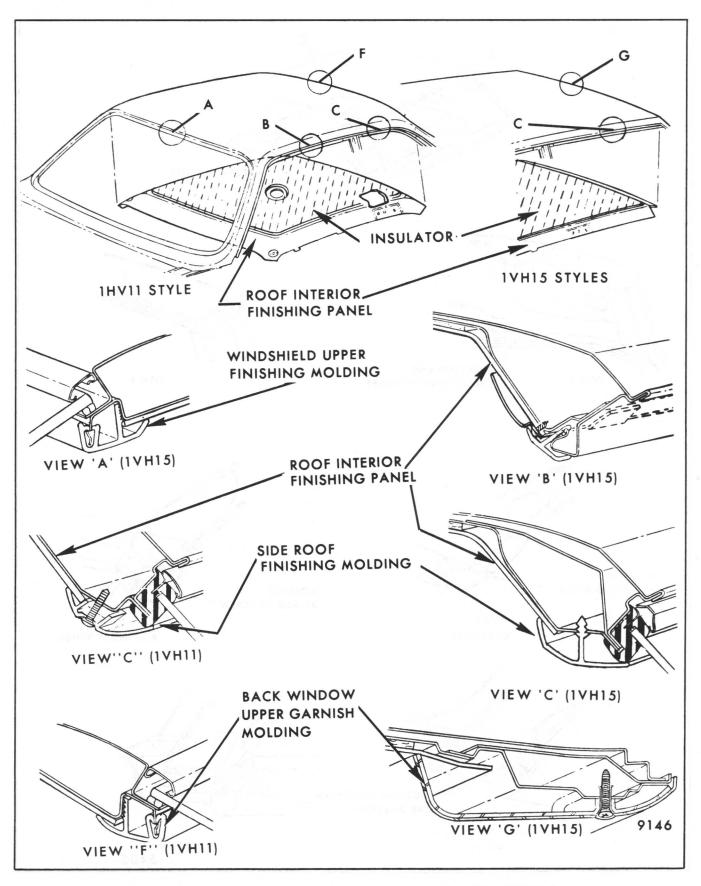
Headlining (Roof Interior Finishing Panel) Assembly - "11 and 15" Styles
